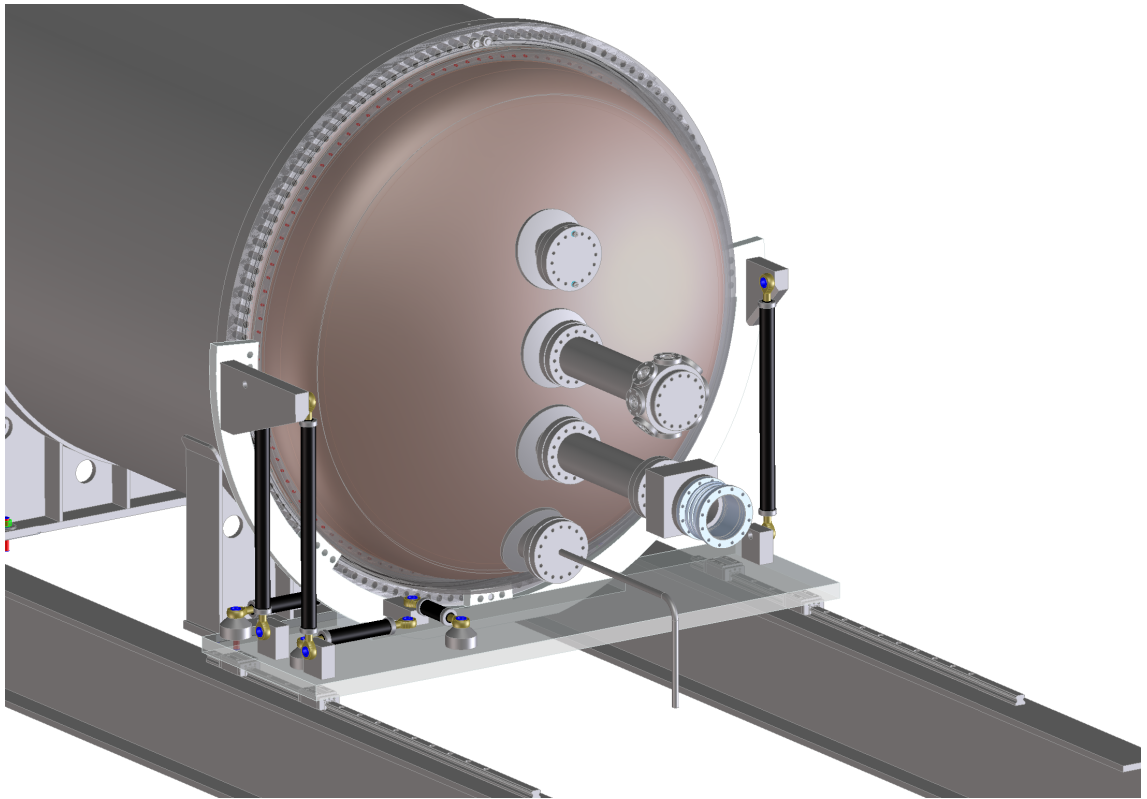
Hexapod Support Fixture, Attached to Torispheric Head
